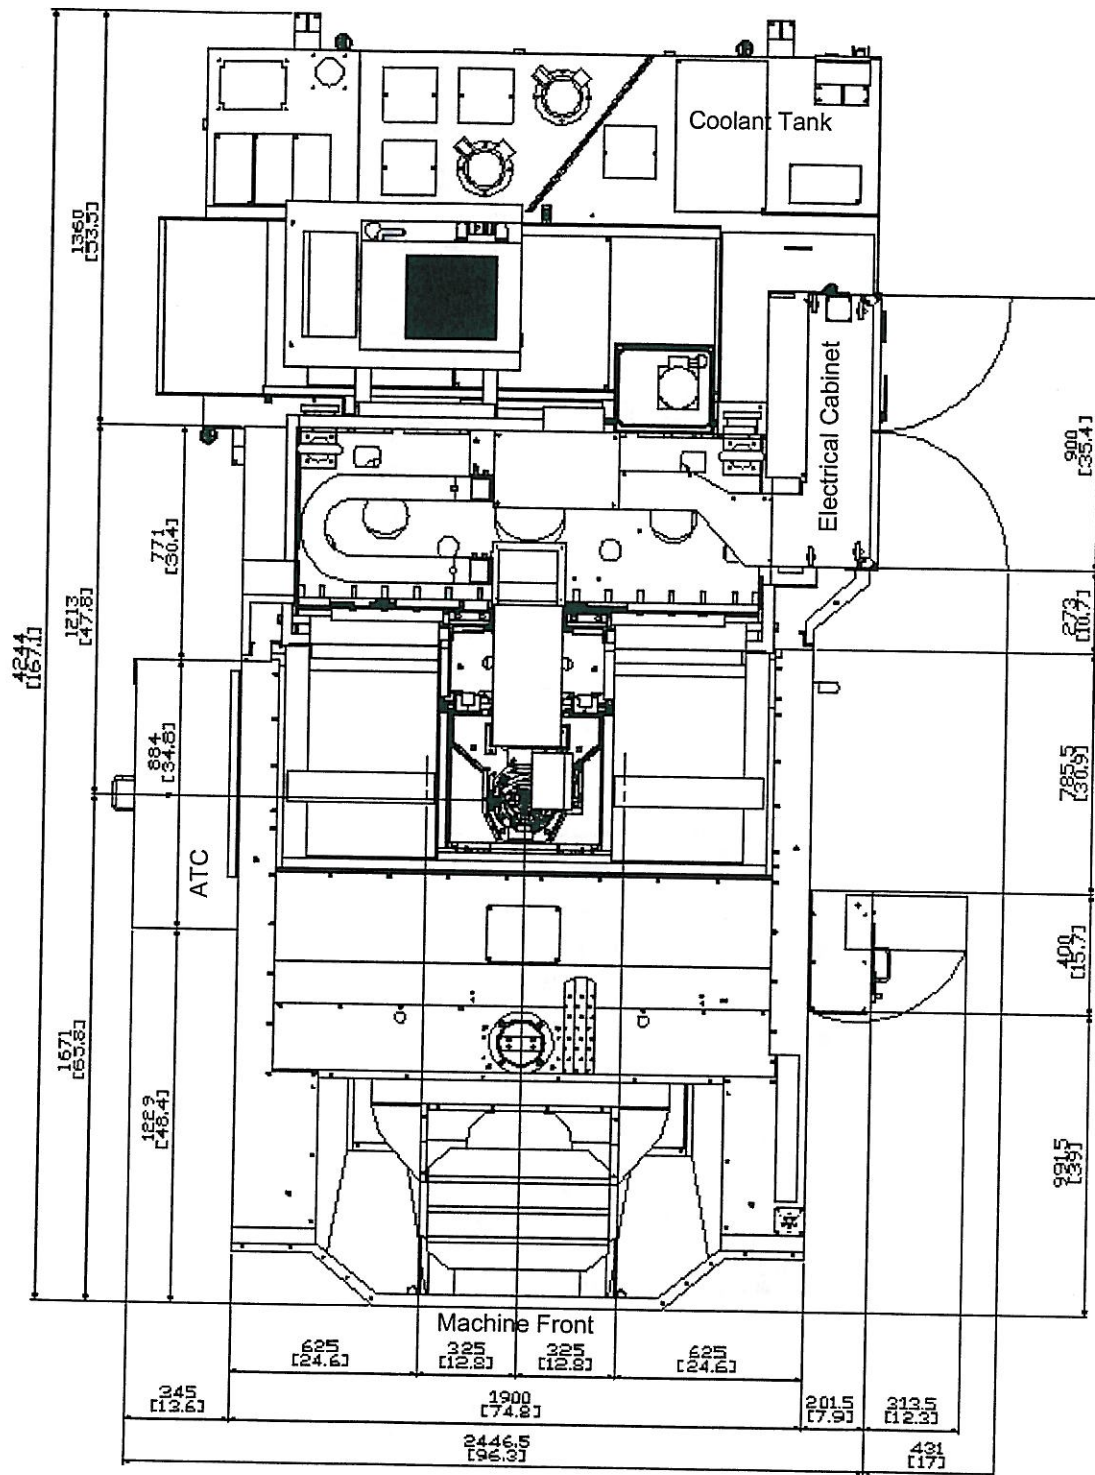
S33 APC Floor Layout (Coolant Tank Chip Tray without Options)
